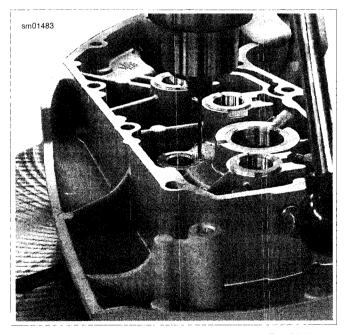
Drilling Pinion Bushing Dowel Pin Hole in Gearcase Cover
